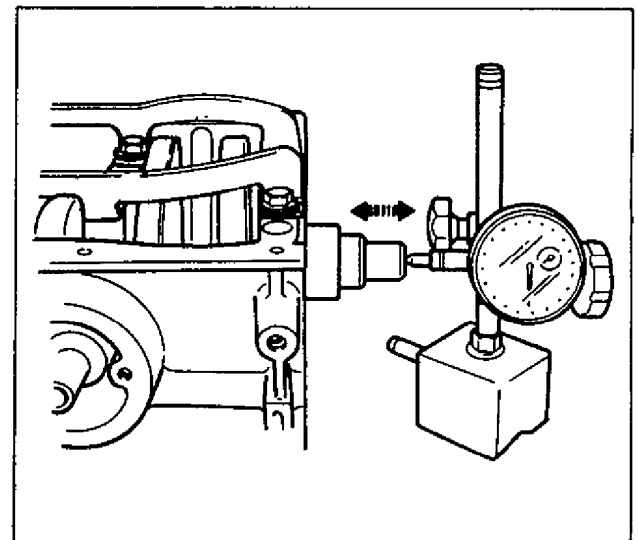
A-136 Measuring Thrust Play of Crankshaft
